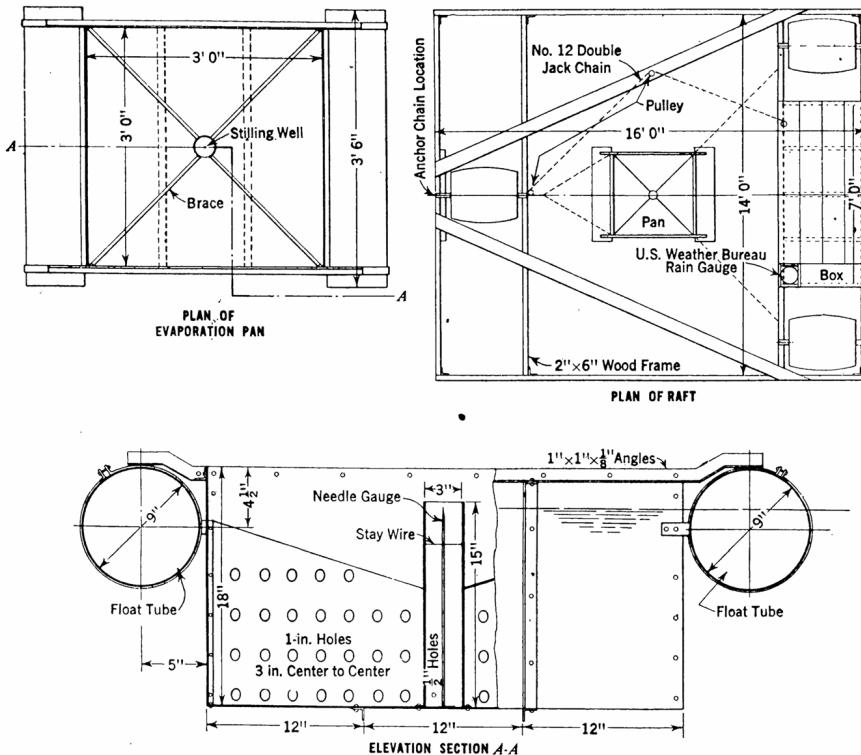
PLAN AND SECTION, U. S. GEOLOGICAL SURVEY FLOATING PAN (TYPE (4))
